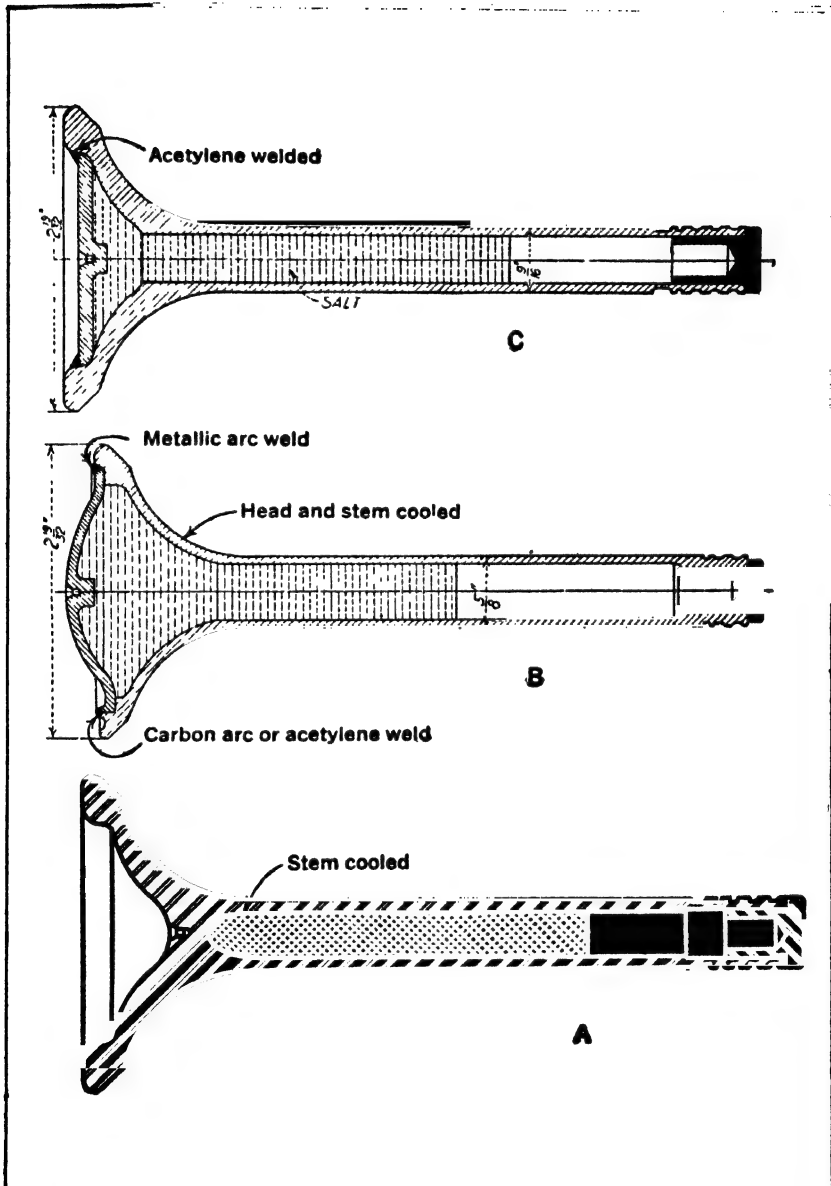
Internally Cooled Exhaust Valve Stem Shown at A. Internally Cooled Valve Heads and Stem Shown at B and C.
